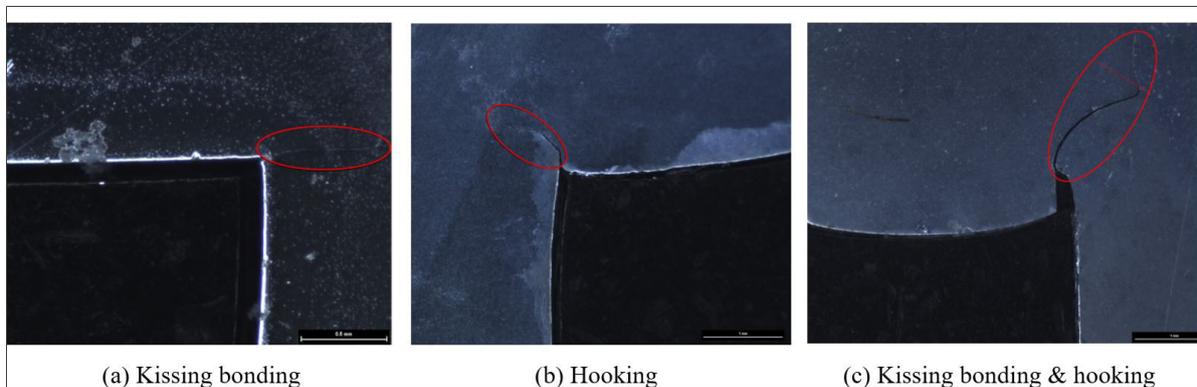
FSW defective pieces macrographs, picture shows pieces with the defect (a) kissing bonding; (b) hooking; and (c) kissing bonding and hooking, respectively.
